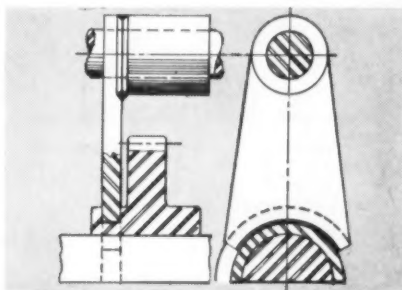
In this design, the shifting shank actually becomes the shoe to engage the spool cut in the hub of gear to be shifted.
